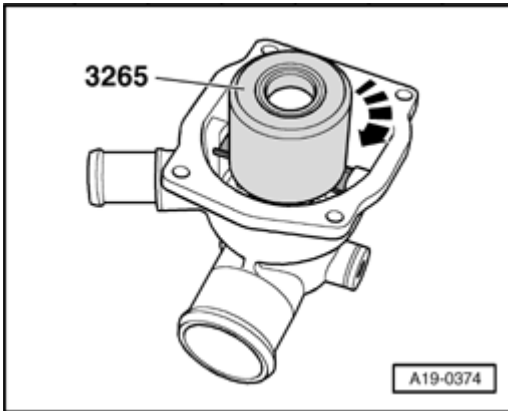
Pressing Down Retaining Bracket Using Seal Installer 3265
